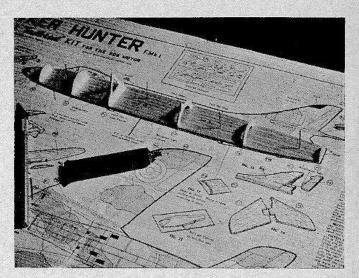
Balsa keels or backbone members are attached to the plan and half-formers cemented in position as shown.
